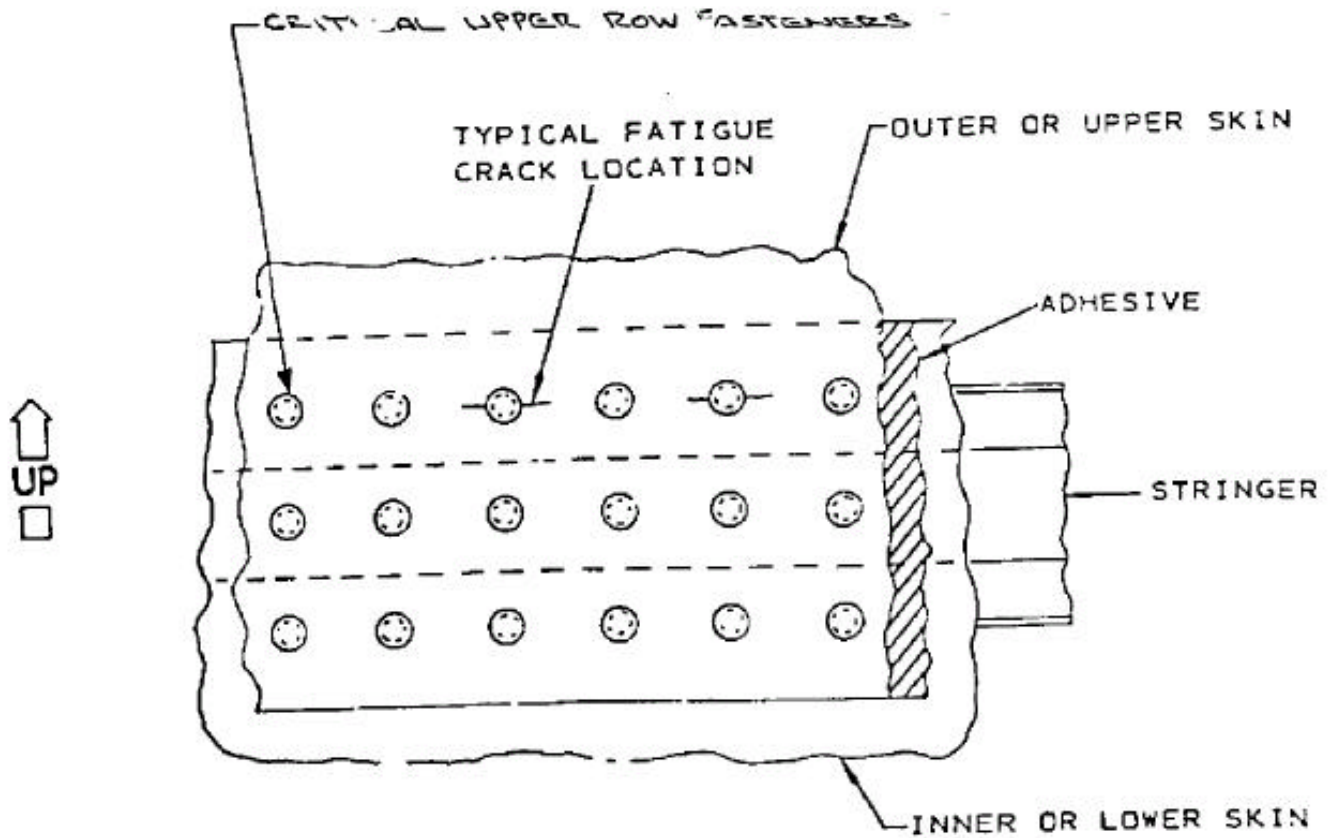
Schematic of typical cracking found in the upper skin, upper row of fasteners of longitudinal lap joints.
